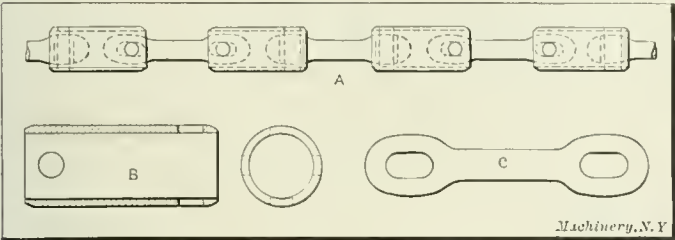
A Simple Construction of Flexible Shaft—Upper View is Full Size, Lower Views are Twice Actual Size
